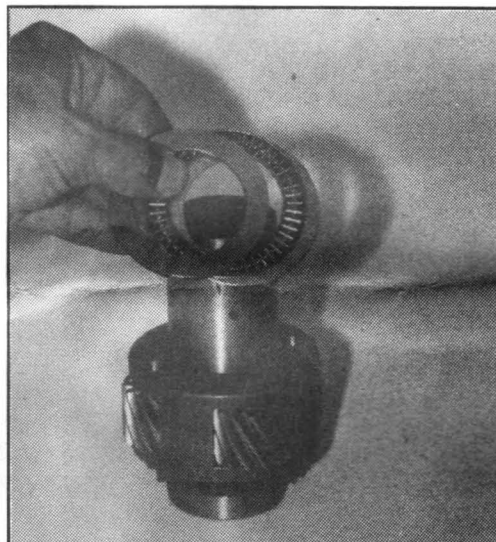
Lift off the gear housing & remove the inner thrust bearing set. Notice the thin race is next to the spider assembly.
